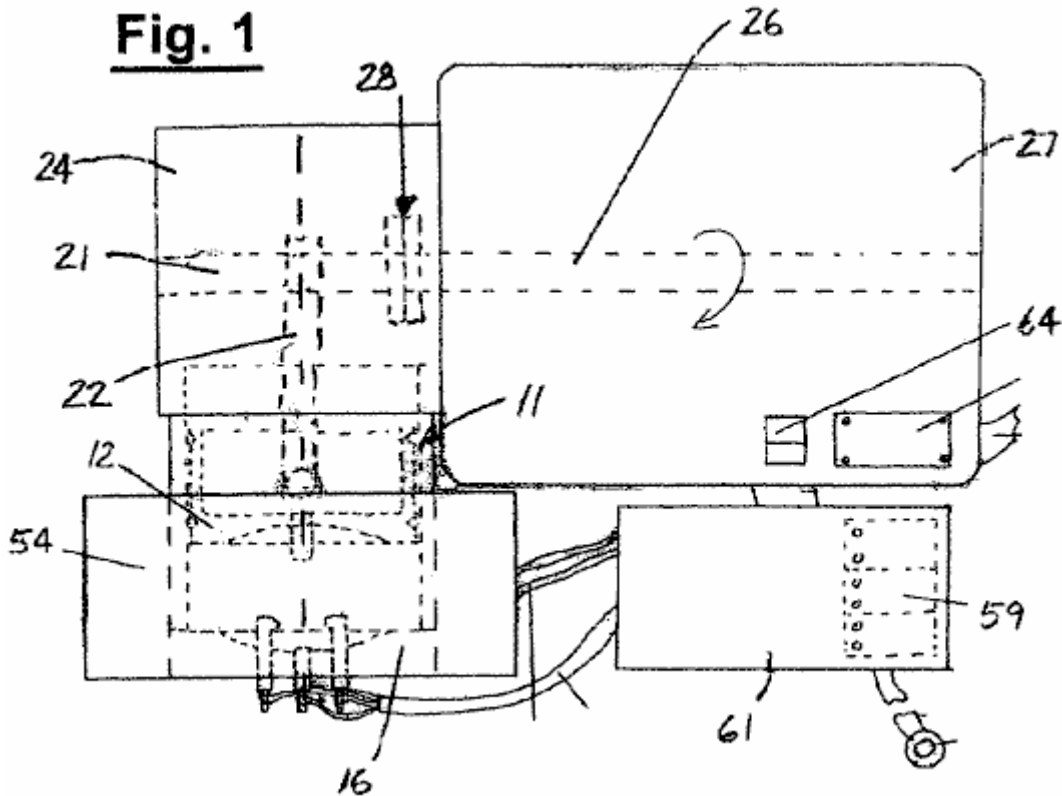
is a top plan view of one embodiment of an internal explosion engine and generator incorporating the invention.
